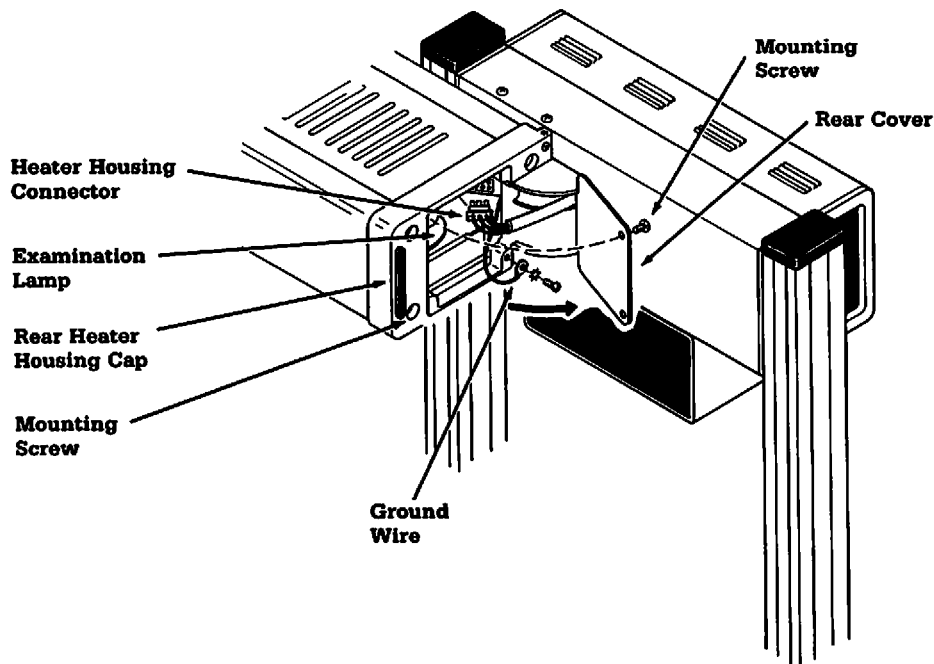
Removal of Back Cover from Heater/Lamp Assembly.
